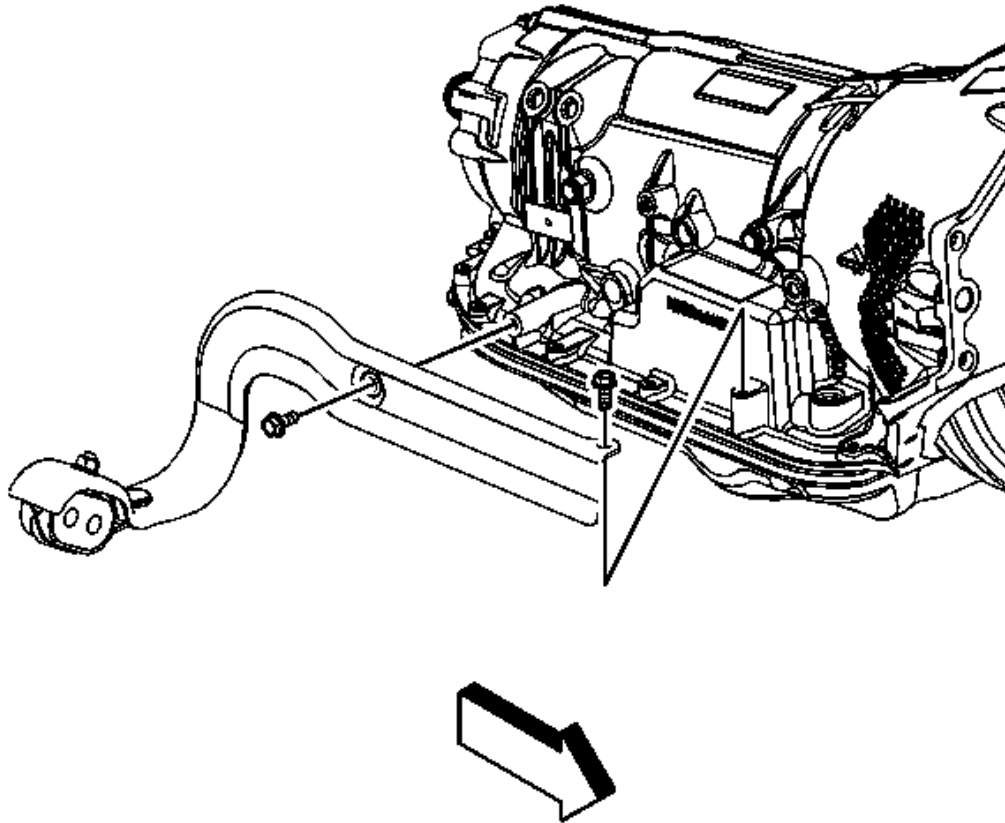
View Of Exhaust Pipe Hanger Bracket & Bolts
